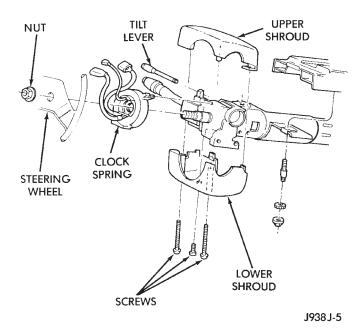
Steering Column Shrouds Remove/Install-Typical
